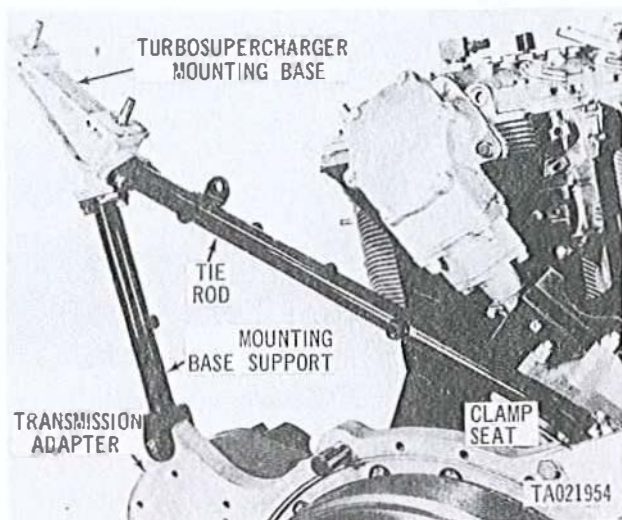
Removing or installing turbosupercharger mounting base, tie rod and base support.
